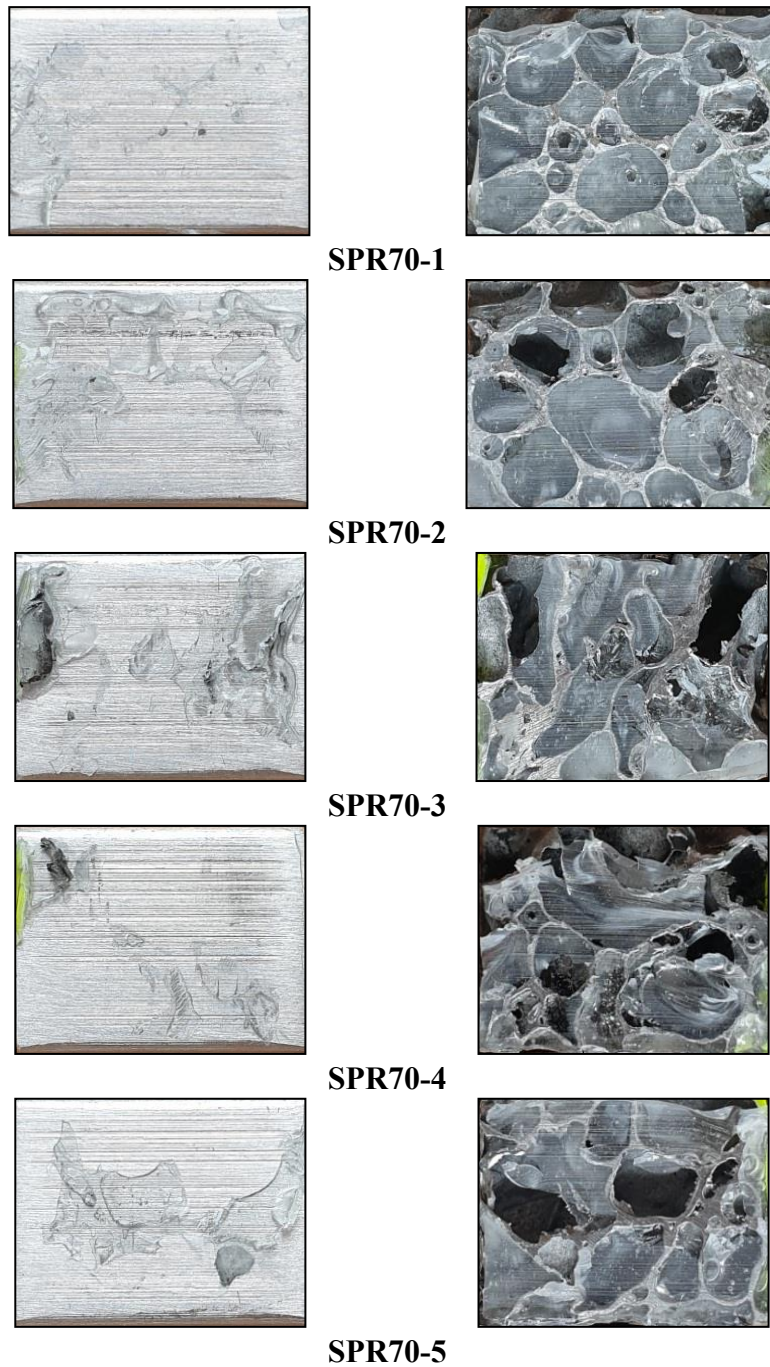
Bonding Surfaces of Aluminium Block and Specimens with Surface Porosity Ratio >70% (SPR70) after Shear Test.
